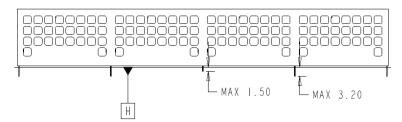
Length of the compliant pins into the board, for belly-to-belly application
